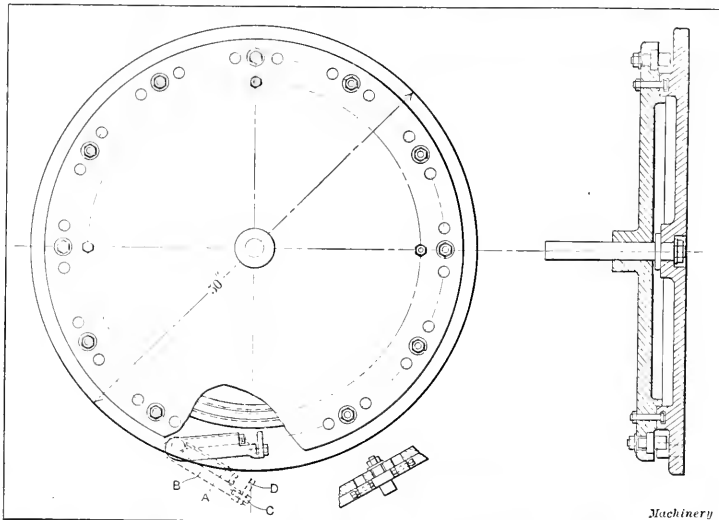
Design of the Planer Indexing Fixture used to plane the Turret and Turret Slide
